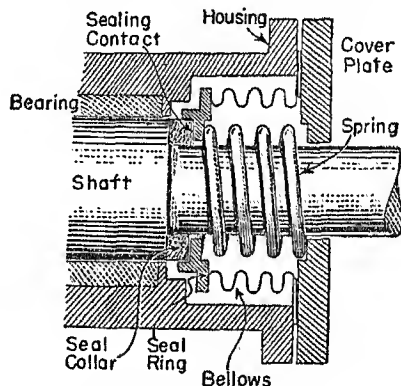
The Shaft Seal Spring May Be Inside the Bellows.
